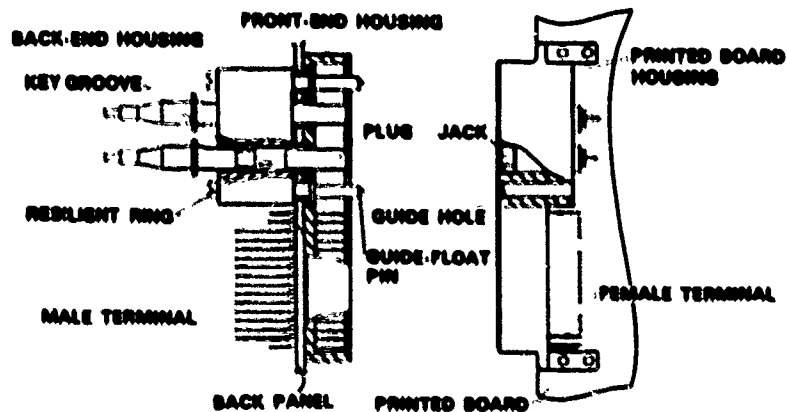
Structure of 2-plug/jack & 64-terminal type plug-in connector
